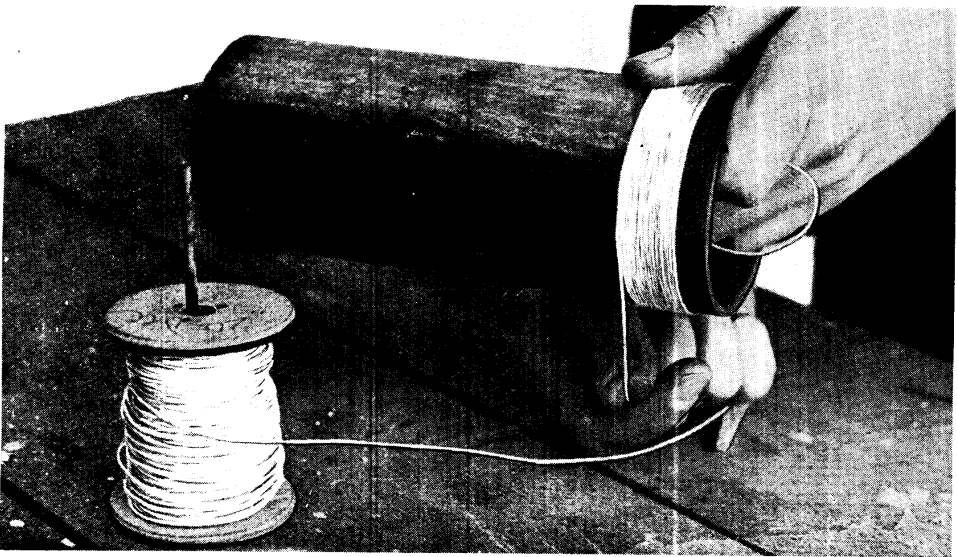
Second stage of coil winding by hand. The right hand is under the tube, the left thumb on the coil to prevent it from being displaced
